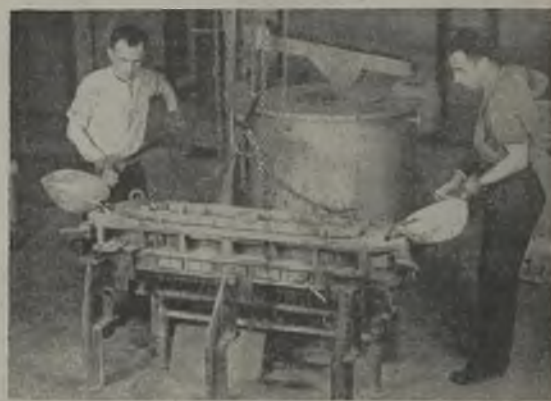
"TWO-HANDED" METHOD OF POURING "ROCKER-COVER" CASTING.
